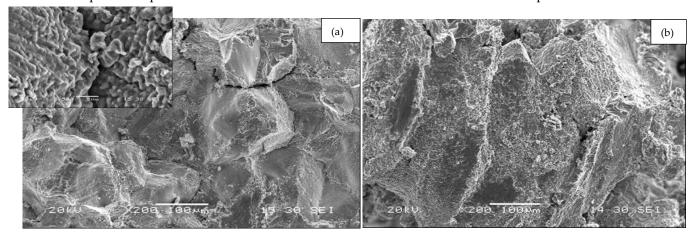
SEM FRACTOGRAPH OF GLEEBLE SPECIMEN TESTED A) AT 1160°C HELD FOR 0.5 SECONDS AND B) AT 1160°C HELD FOR 3 SECONDS
